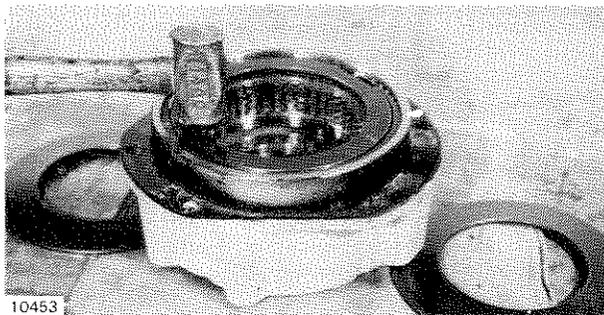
ASSEMBLY OF THE BRAKE (Page 2 of 4)
